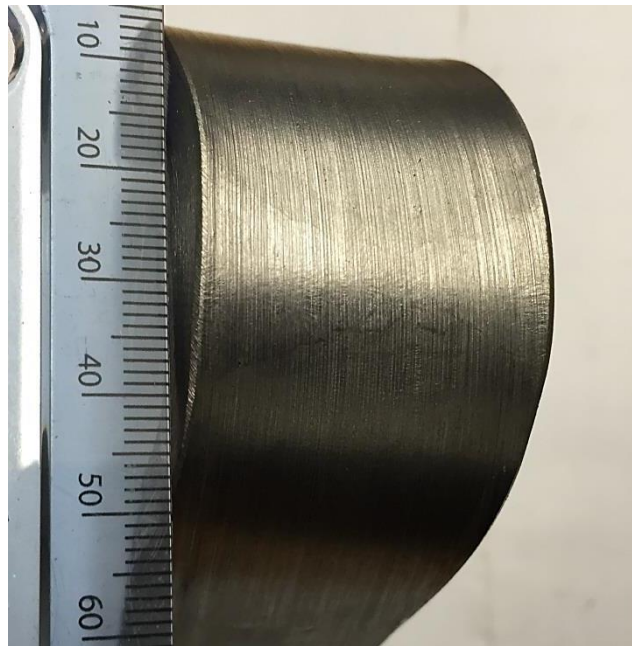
sample 2 side bend test, face view (Heat treated for 579h at 635°C prior to welding and a 12h PWHT at 635°C).
